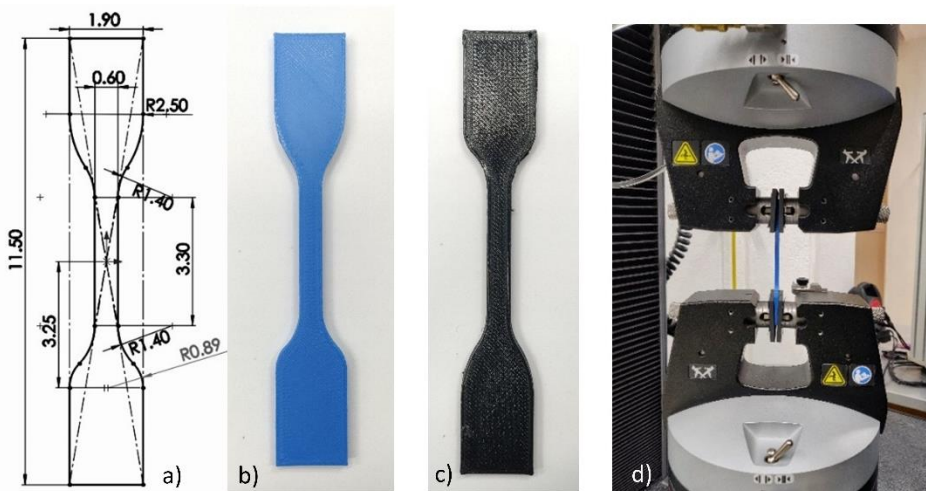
Tensile testing a) sketch drawing b) solid PLA c) solid TPU d) Testing
